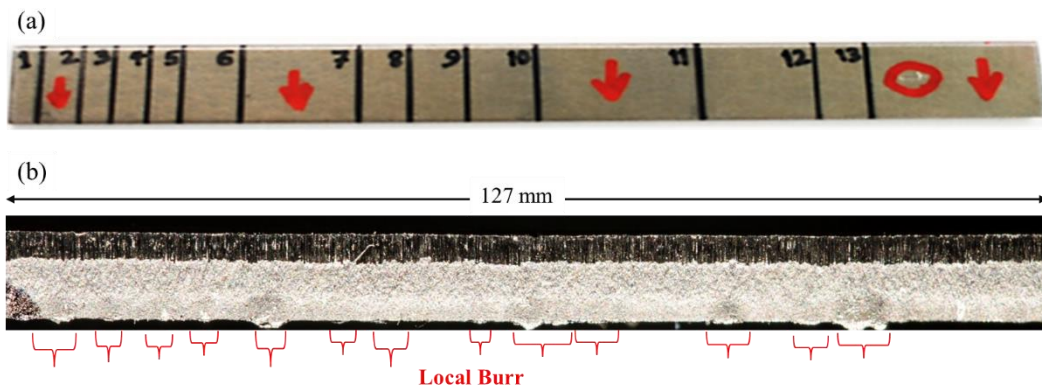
(a) Selected locations for local burr measurements on the sheared sample; (b) local burrs on the sheared edge of DP980-1 trimmed with worn inserts after 230,000 cuts.
